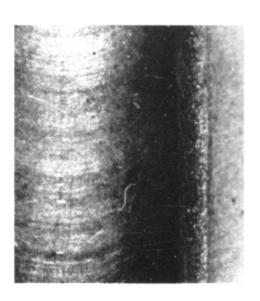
Tungsten-Arc Weld, ac, on E-130R2 Bomblet With Addition of 4043 Filler Metal
